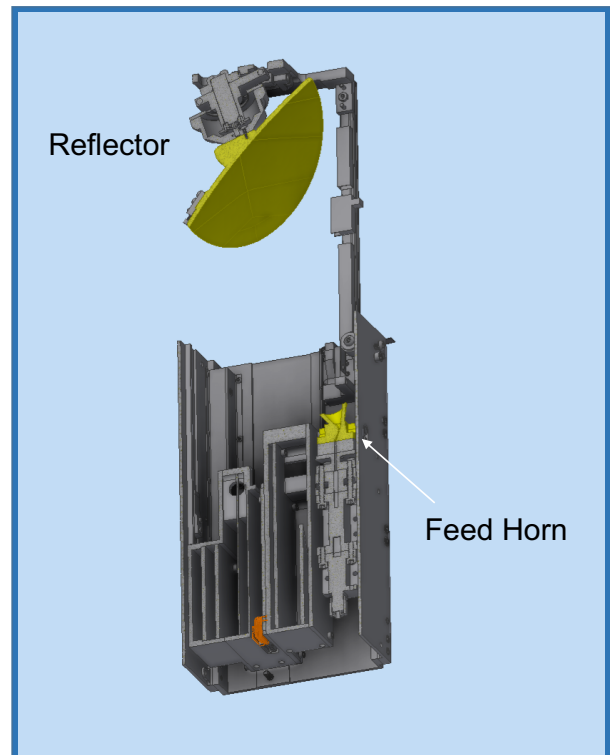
Cross section view of the optical train front end of the PolarCube CubeSat radiometer. The parabolic reflector and 3D-printed metal feed horn are highlighted in yellow.
